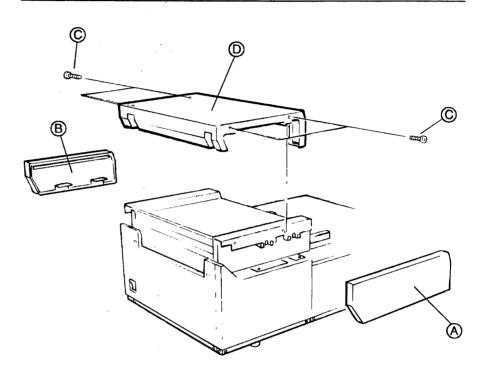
Removing Top Cover of IS510 Upper Unit
